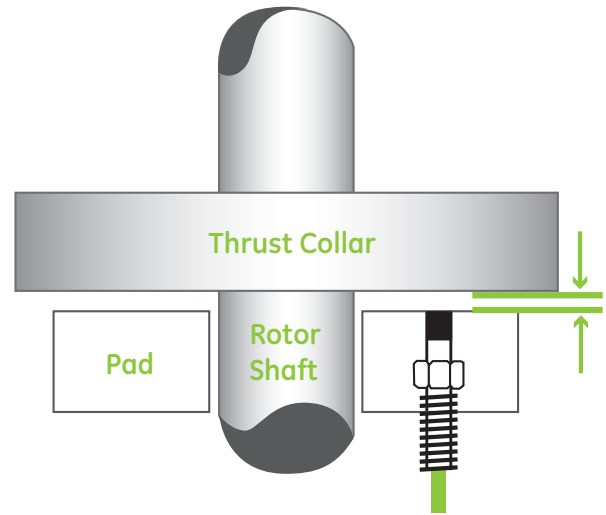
This simplified drawing shows an eddy-current transducer mounted to one of the thrust pads and observing the thrust collar, so that it can measure the thickness of the lubricating oil film between them.
